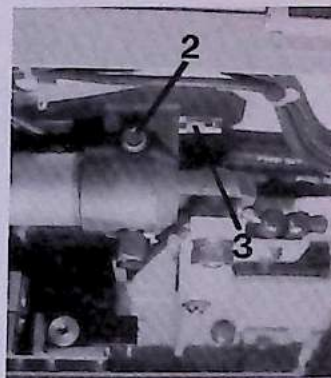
Door Cylinder Jack Adjustment (Only Door Types A, B, D, E)
